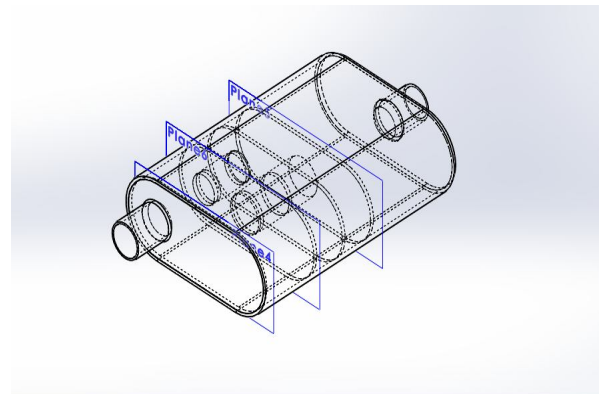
wire frame model of Oval cross sectional muffler with single outlet
